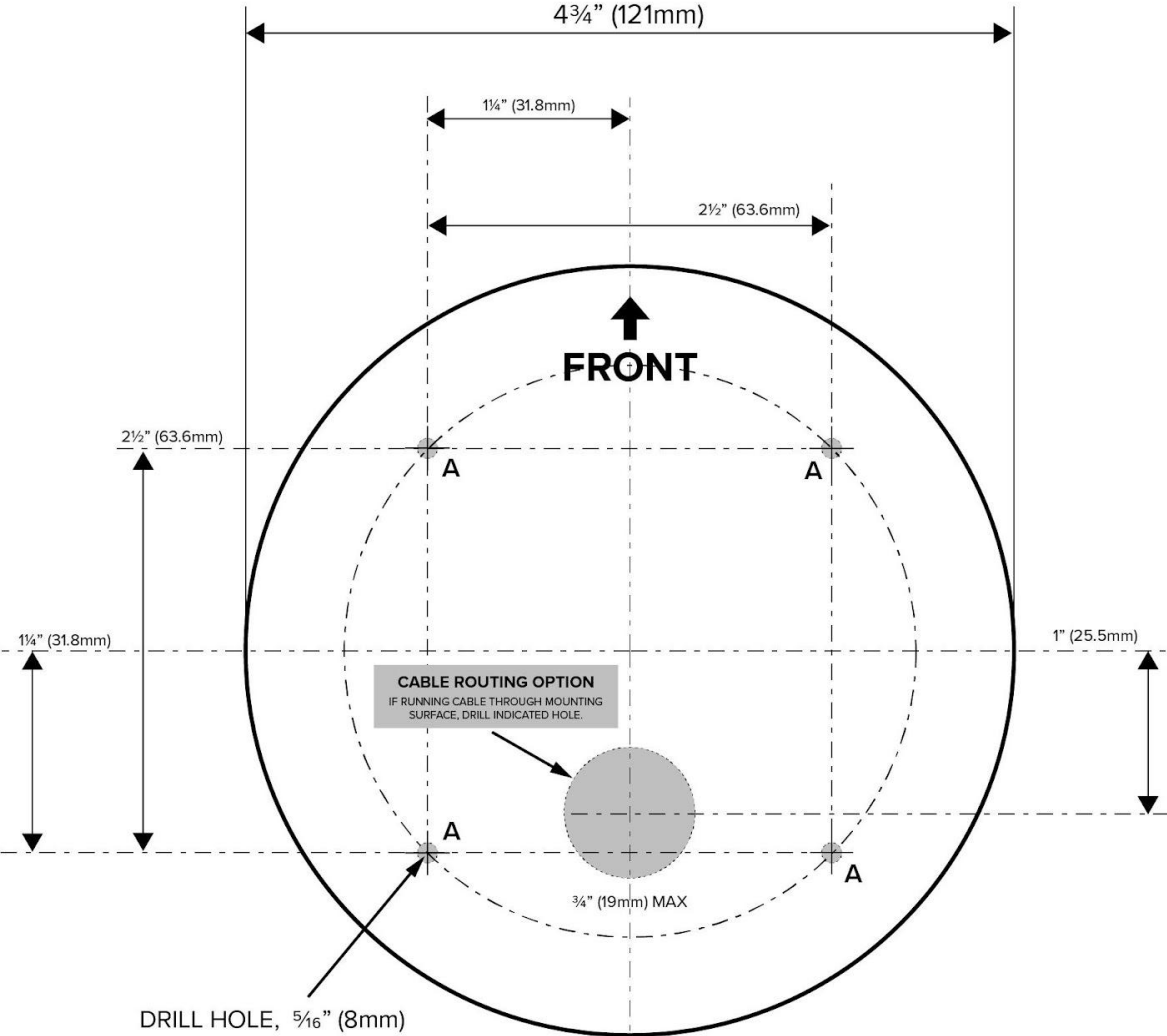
Mounting Hole Dimensions - Bolting up from Floor Diagram
